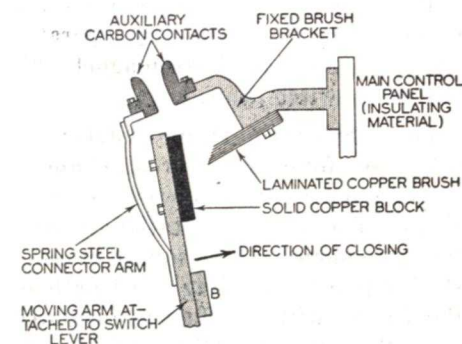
Contact details of a typical brush switch. This becomes an automatic switch or magnetic contactor when the switch arm is made of iron and is part of a closed magnetic circuit containing iron block B and an electromagnet mounted to attract this block. Excitation of the electromagnet then serves to close the switch.
